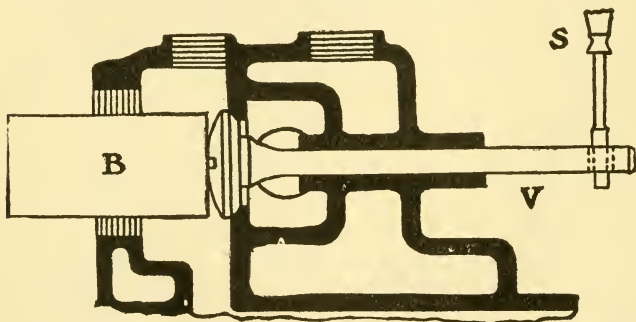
Method of grinding valves in horizontal cylinders. A block of steel B is held against the head of the valve V and the latter rotated on its seat by means of a screw driver blade S inserted in the slot in the stem, the face having been previously trued by a truing tool. In cases where the stem of the valve has no slot, a pair of gas pliers can be used to grip it, being careful in so doing not to mutilate the threads thereon.
